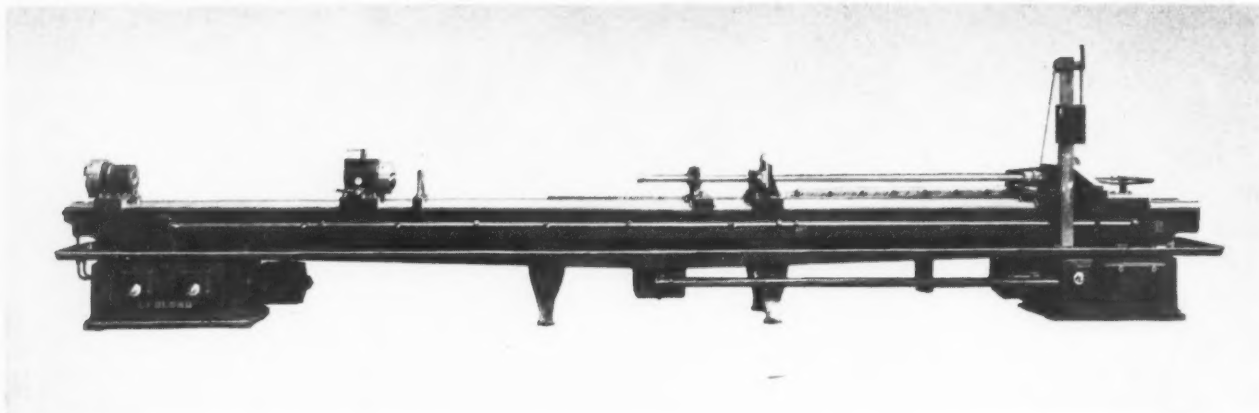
Pratt & Whitney Deep-hole Reaming Machine
